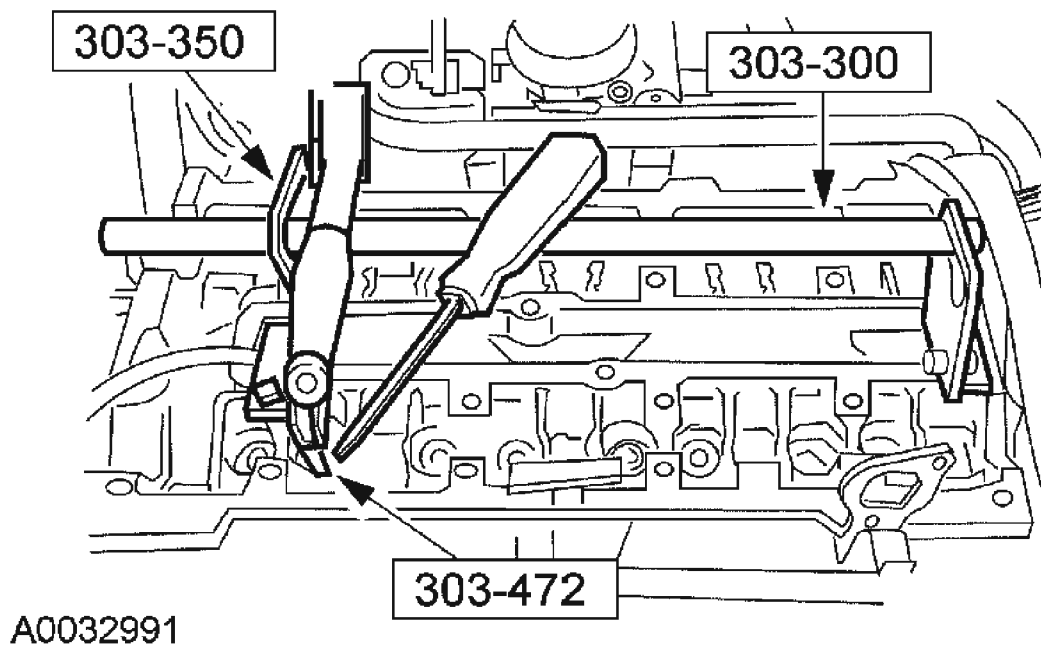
Using Special Tools To Apply Compressed Air To Cylinder
